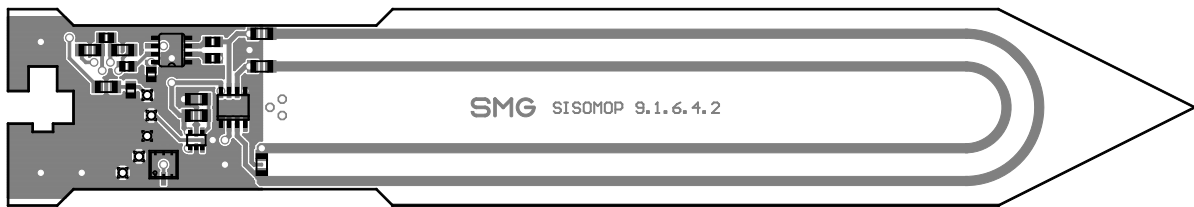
Printed circuit board of the Simple Soil Moisture Probe including surface mounted parts (top layer only). Original size: 185 mm x 30 mm.
